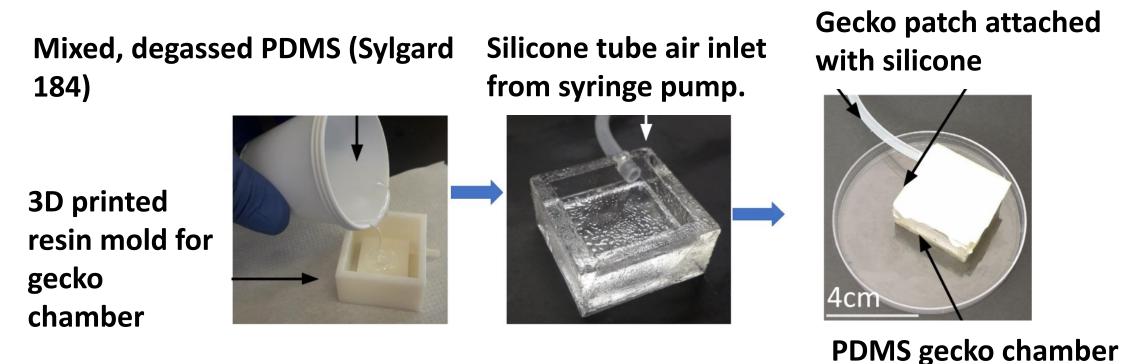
Fabrication process of the gecko chamber using a 3D printed resin mold and PDMS.
